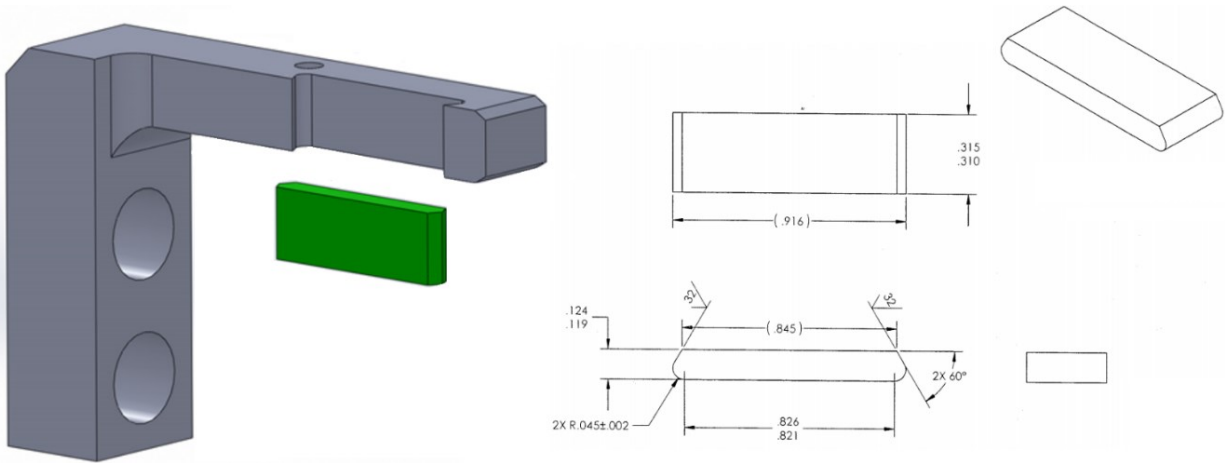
Schematic of the used sample holder and drawing of insert coupon
